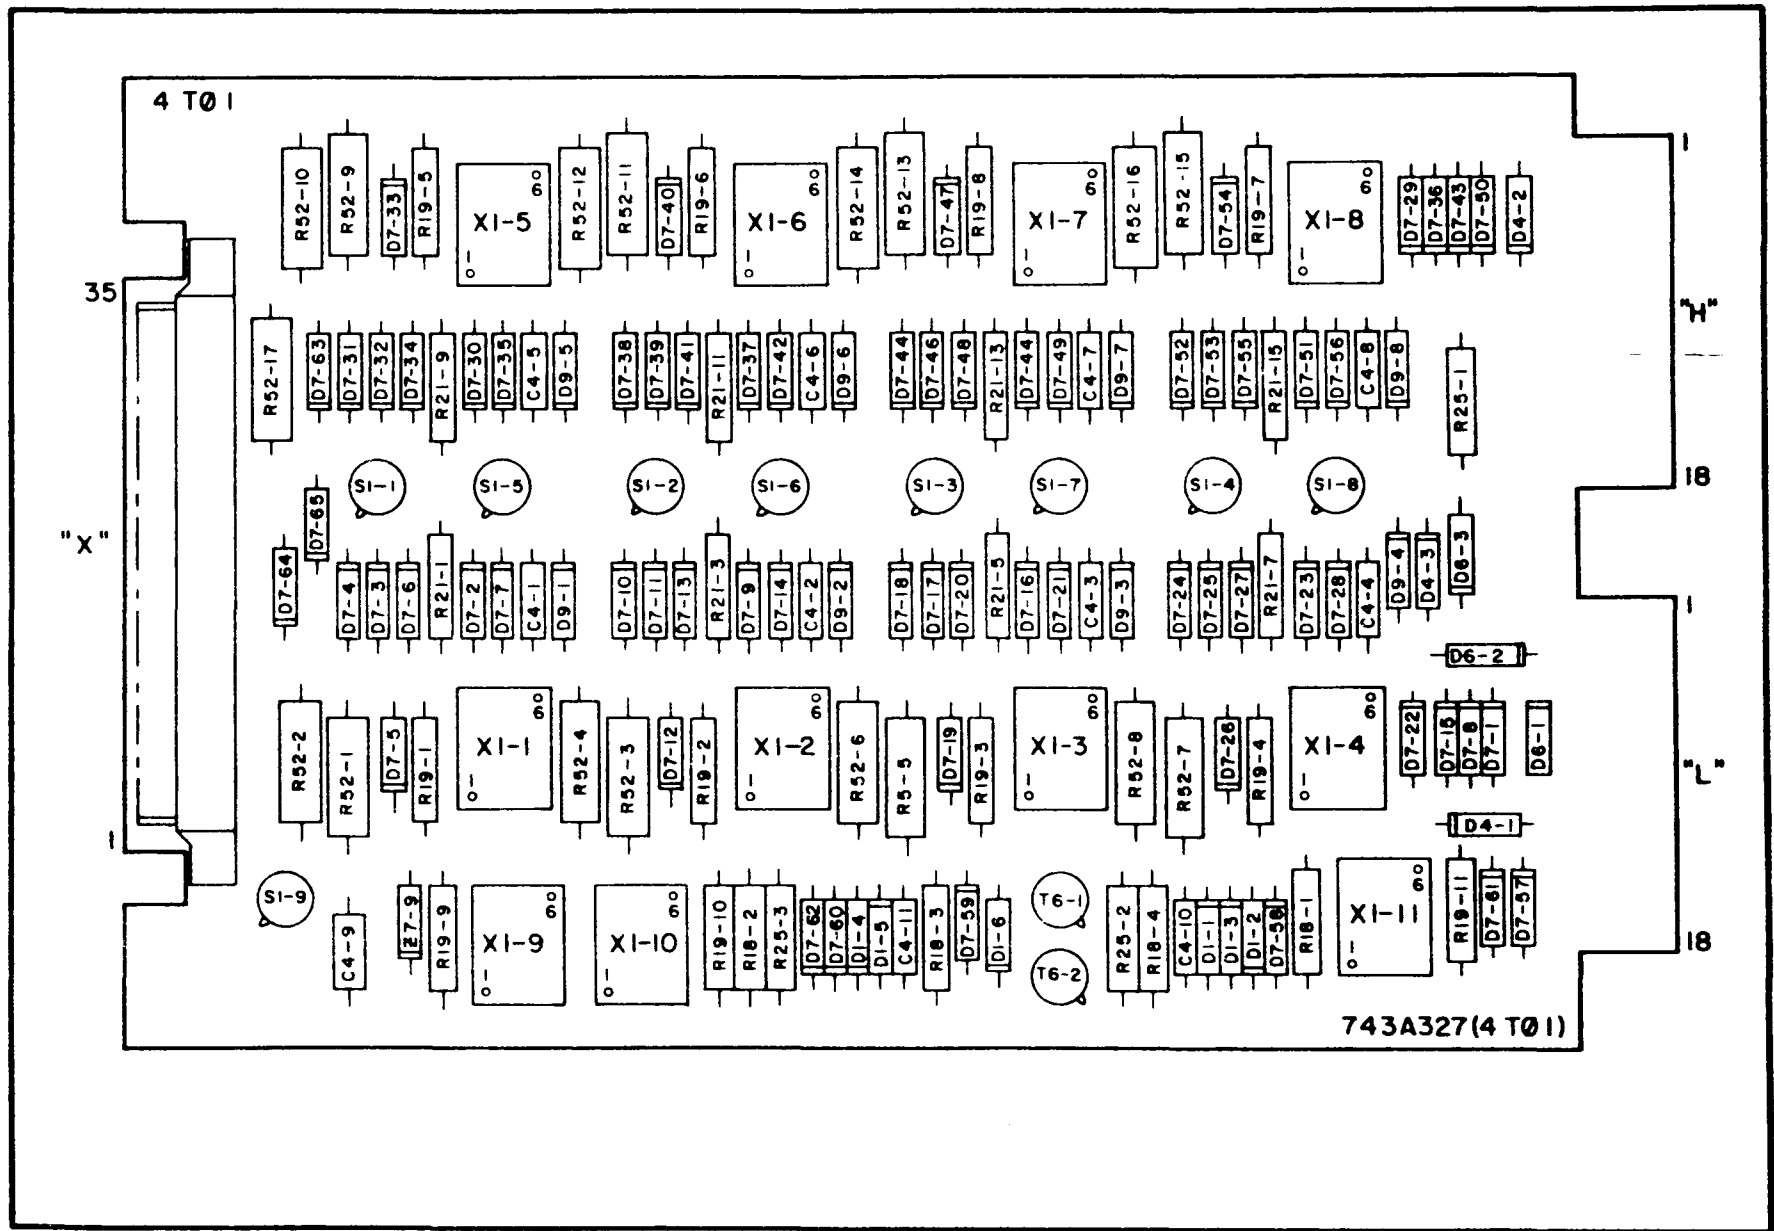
4T01 ASSEMBLY (REF. DWG. 743A327, SUB 16)
